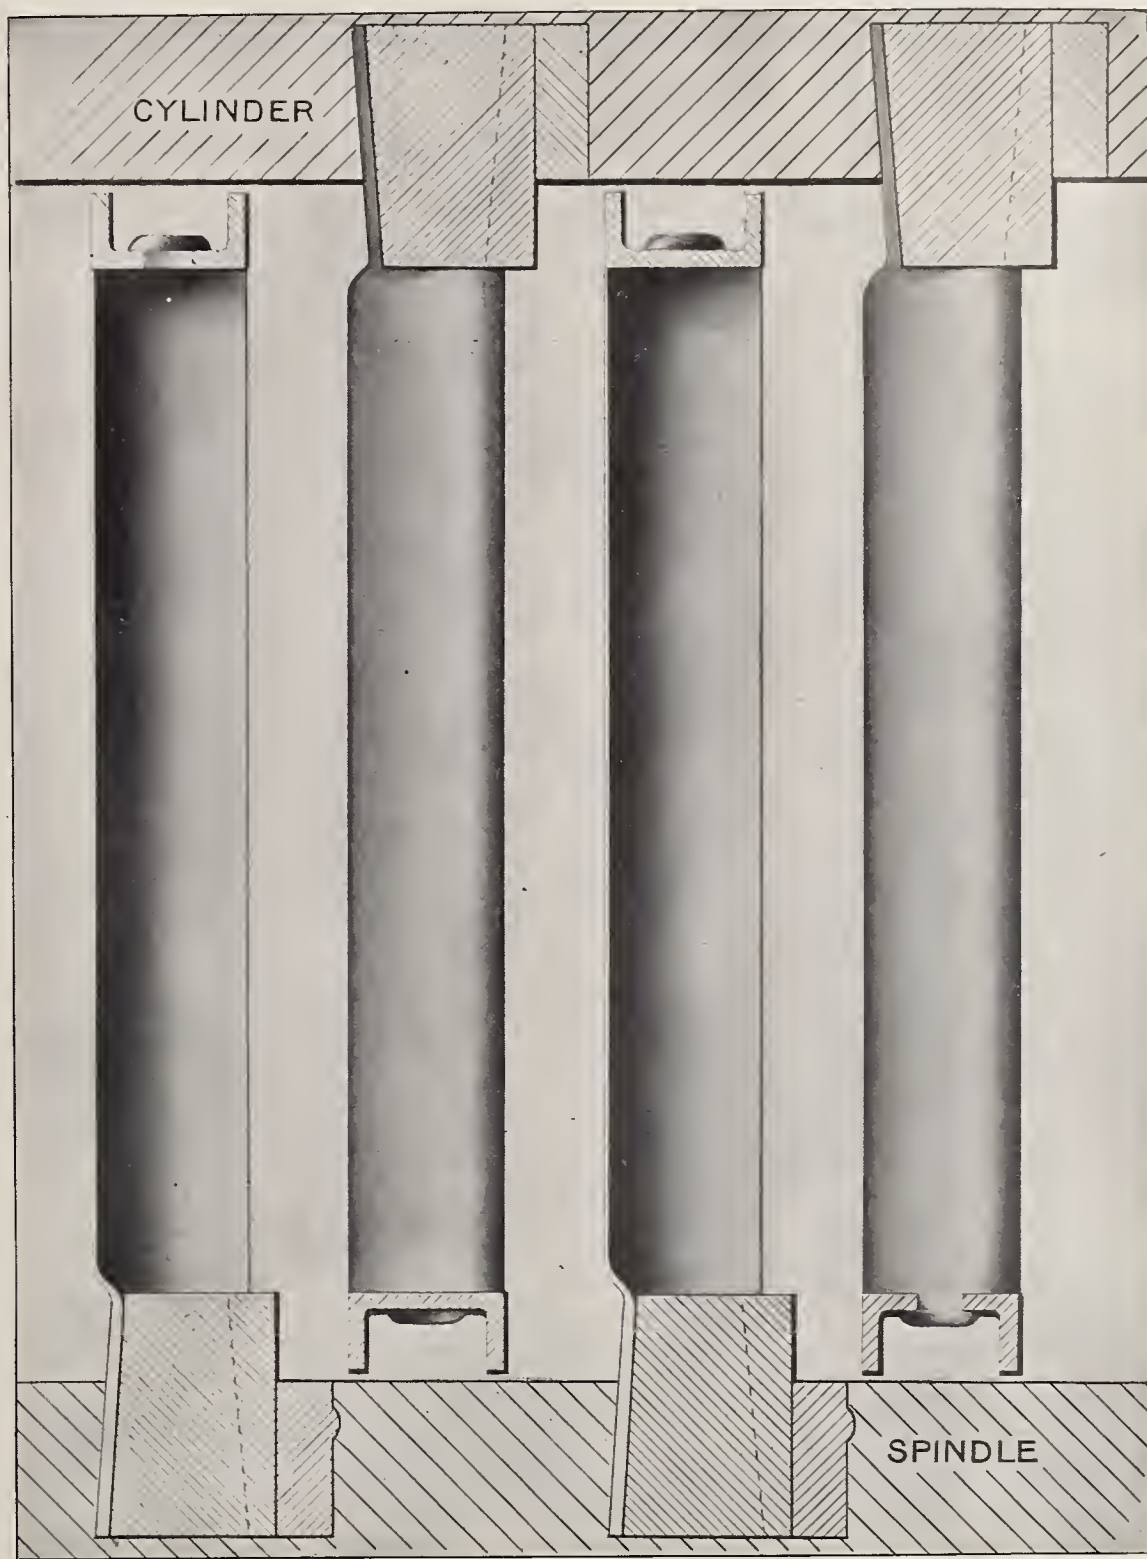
CROSS-SECTION OF THE SPINDLE, BLADES AND CYLINDER OF THE ALLIS-CHALMERS STEAM TURBINE
